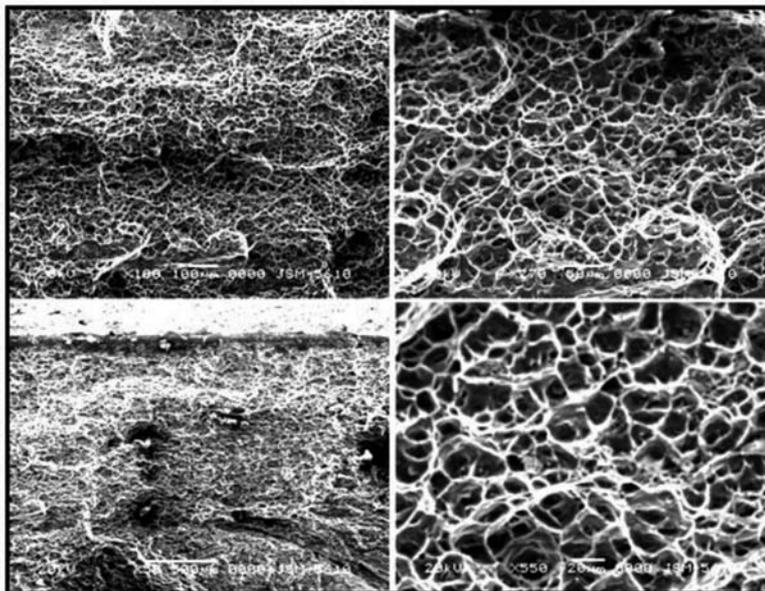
Tensile fractured surface of AA6082, triangular pin at 50 mm/min
